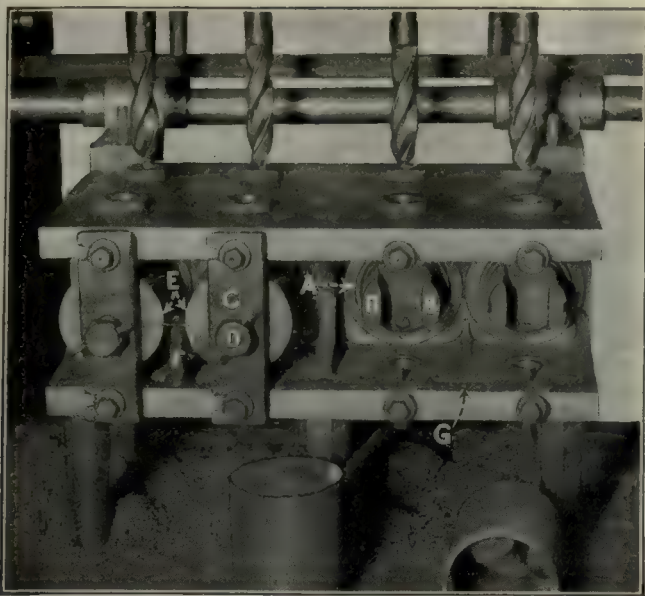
SPECIAL FIXTURE FOR DRILLING PISTON-PIN HOLES
